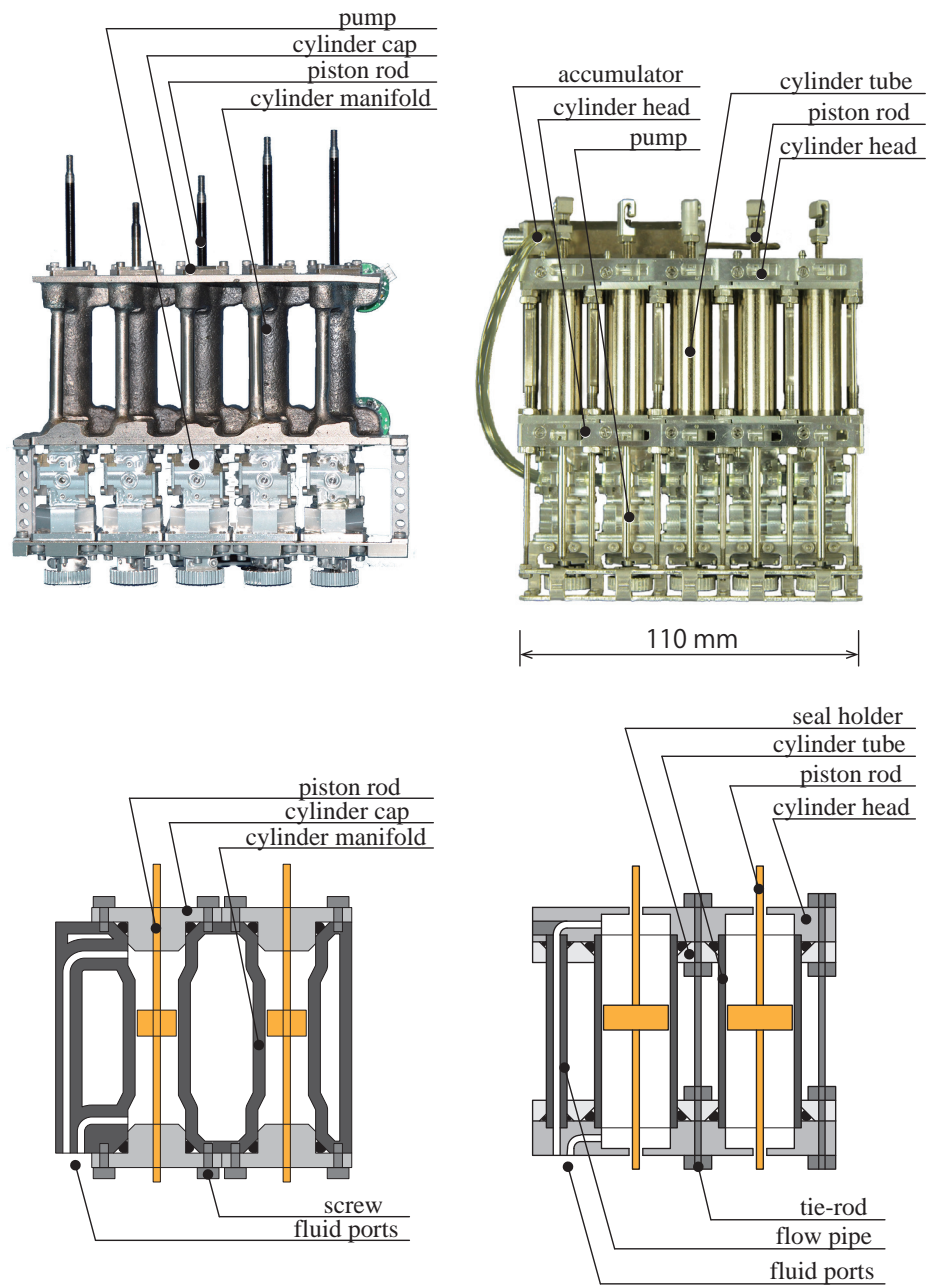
Schematic and picture of the developed cylinder cluster with casted cylinder manifold (left), and tie rod cylinder cluster (right).
